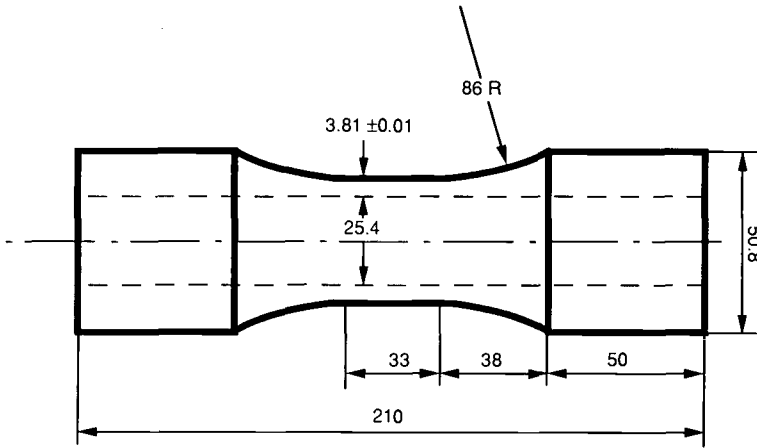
Biaxial fatigue tubular specimen (all dimensions in mm).
